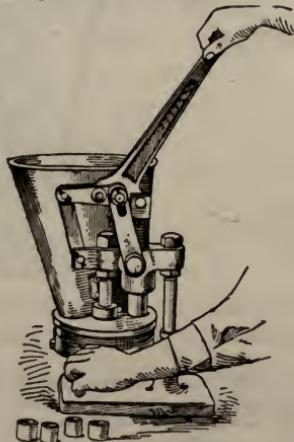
Braun's Cupel Machine—Filling the Mould.
